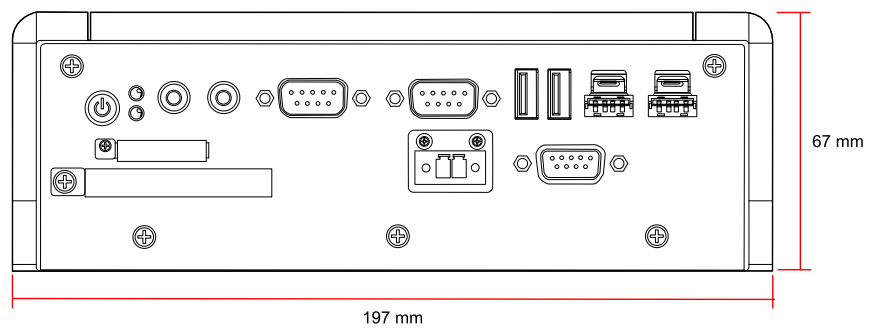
AMOS-3002-2D10A2 Dimensions - Front view
